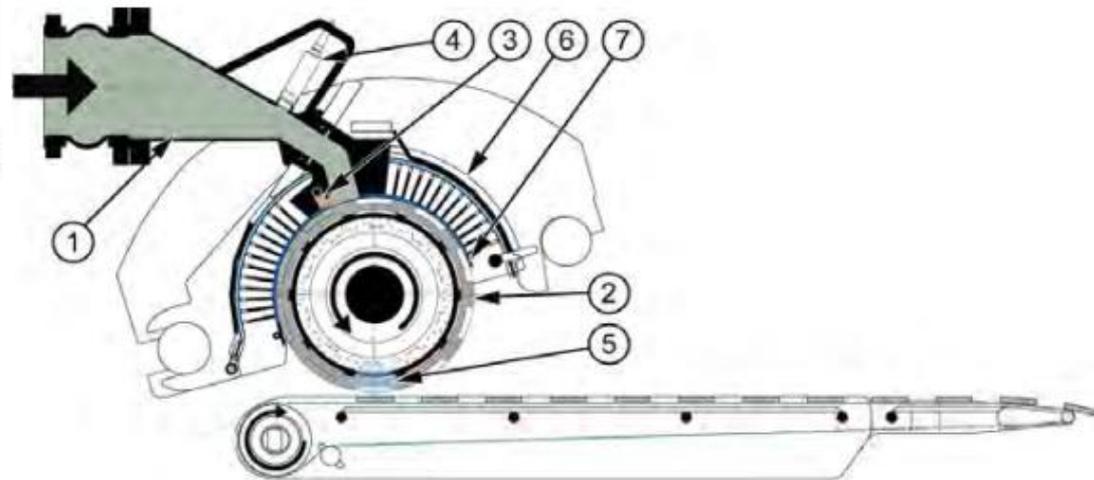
Low pressure forming machine used to produce nuggets, patties as well as 3D forms. 1. Manifold; 2. Drum; 3. Knife; 4. Pressure Sensor; 5. Release Position; 6. Shoe Frame; 7. Shoe Plate. Courtesy of Marel.
